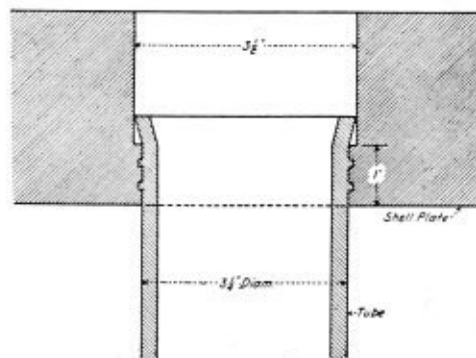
Narrow tube seat formed by counter-boring inner face of drum
